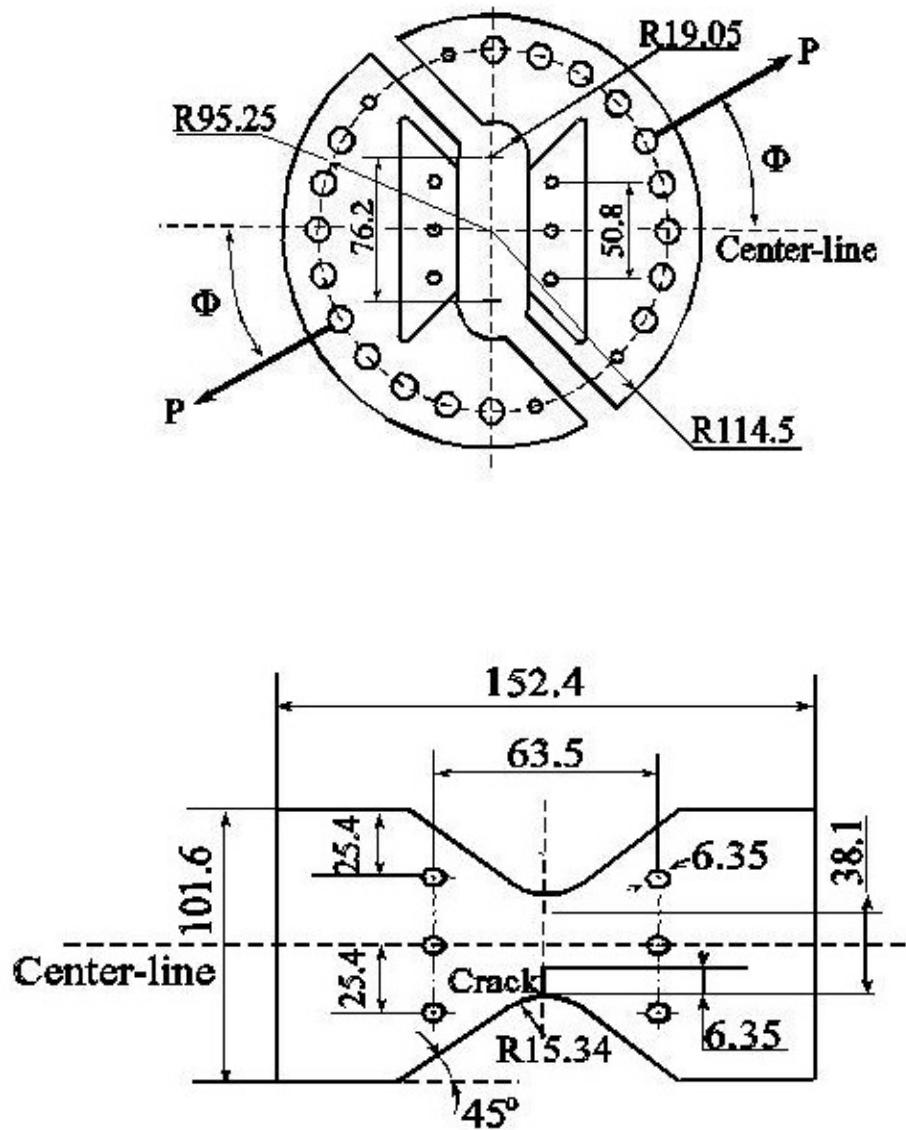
A schematic of the Arcan test specimen and loading fixture (all dimensions in mm)
